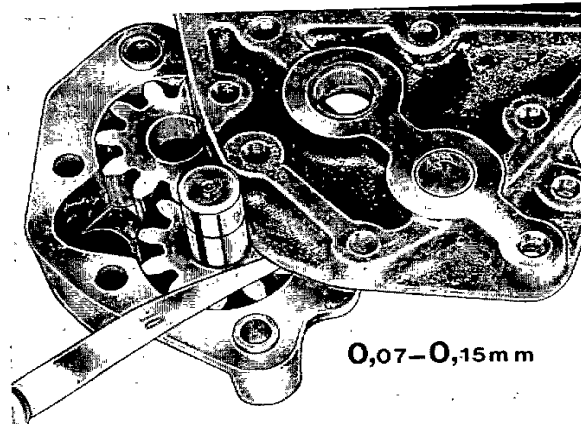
Checking the axial clearance (0.07–0.15 mm) (0.003–0.006")
